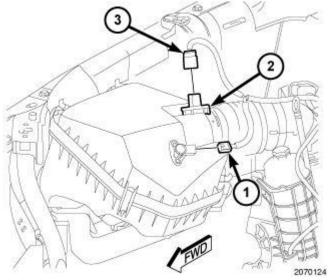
Air Cleaner Assembly Courtesy of CHRYSLER LLC
